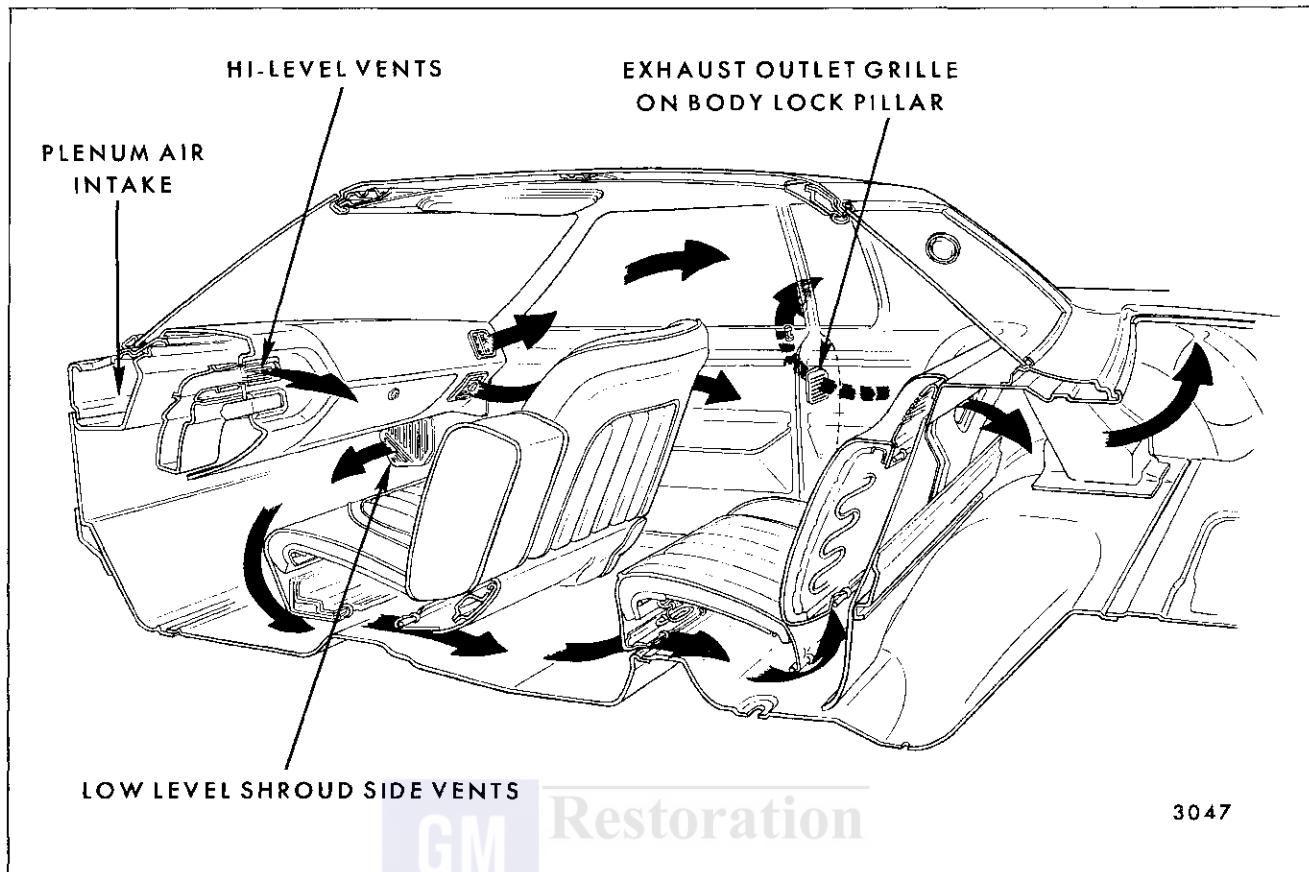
Body Ventilation Flow Patterns — Cadillac "E" Body Shown,
